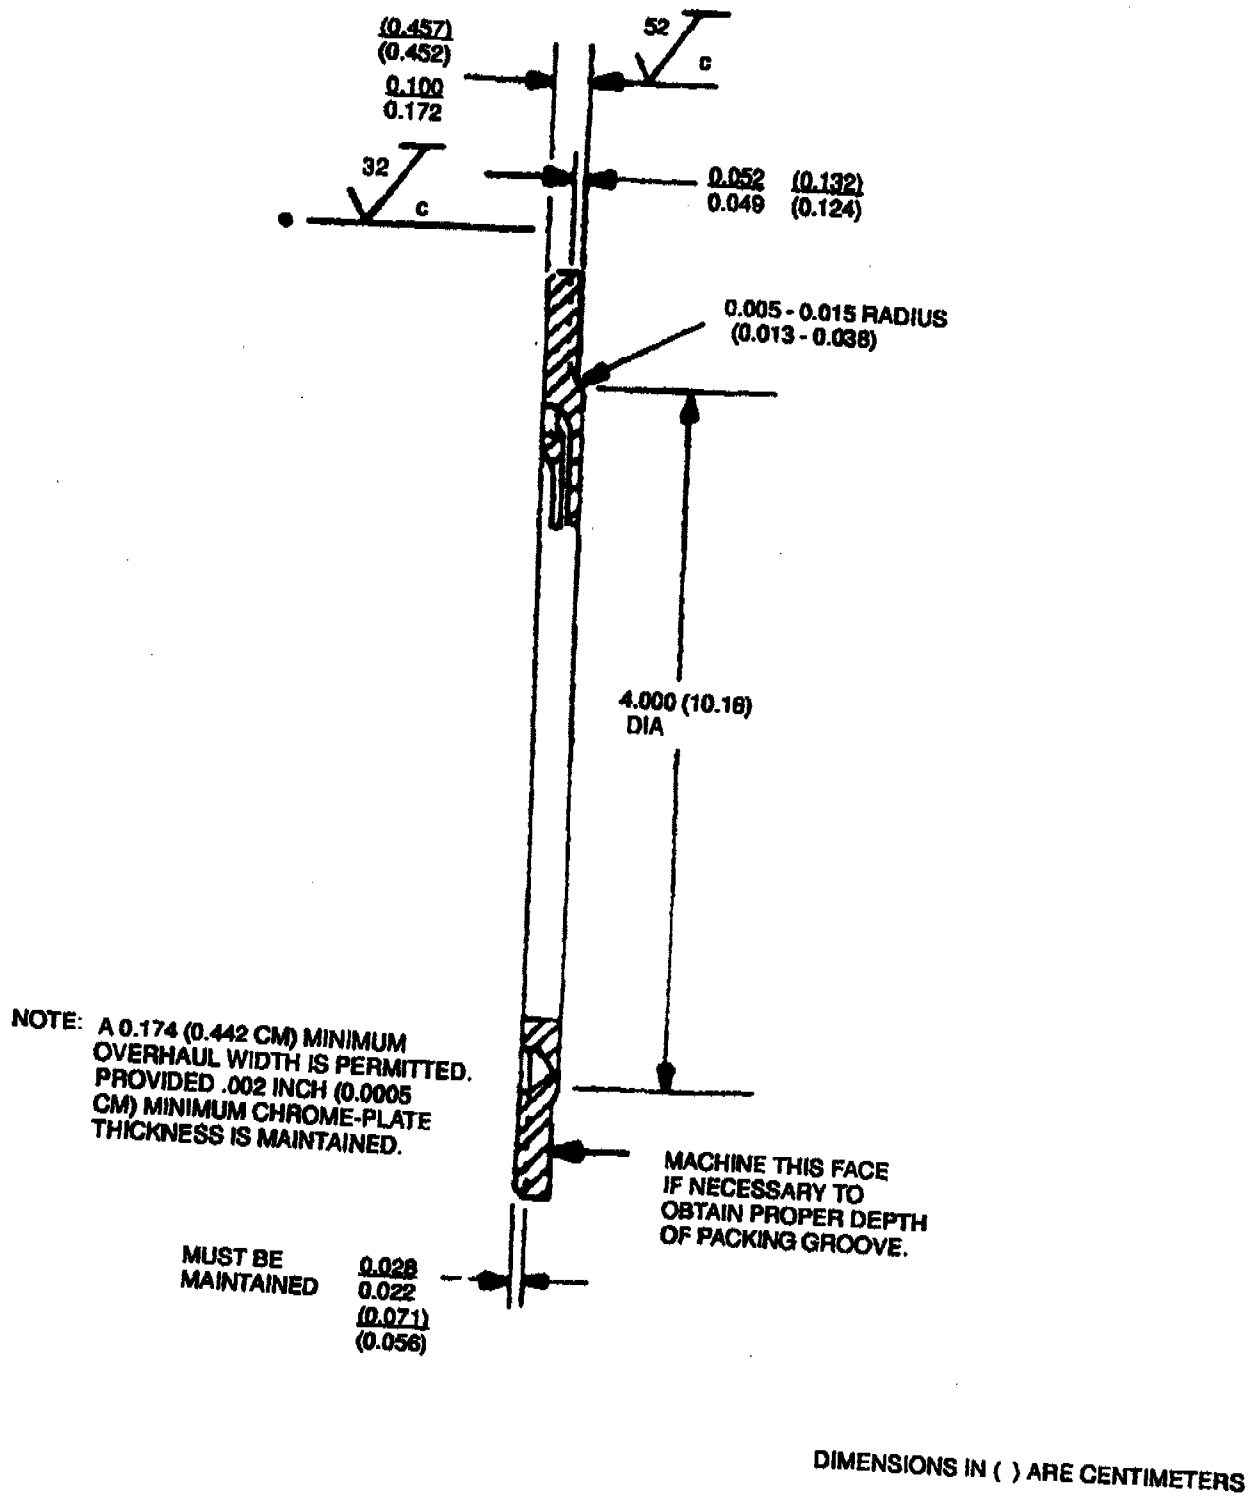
Rework of Bearing Retaining Plate (T53-L-13B, -15, -701, -701A).
